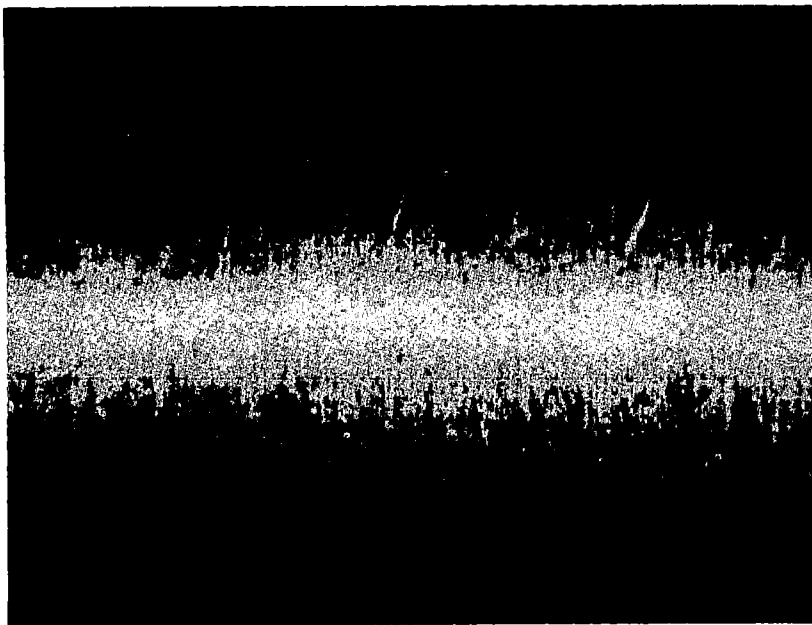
Photograph showing finish on inside of hole bored in a 17S-T disk typical of the disks used in this investigation. 10X
